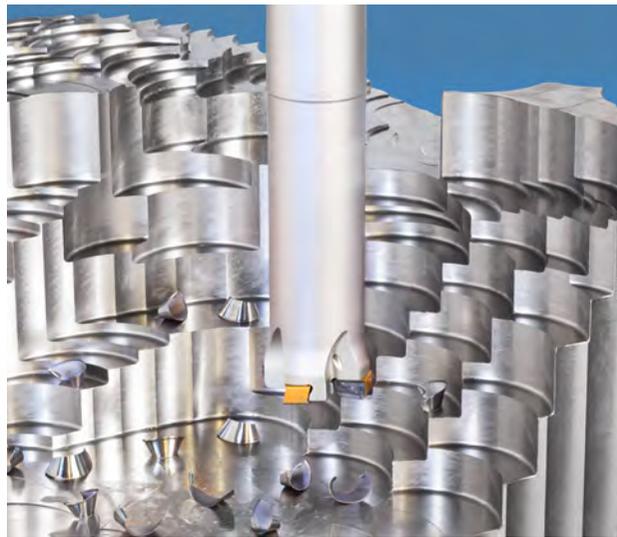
Machining the complex surfaces of a propeller with a barrel-shape endmill.
